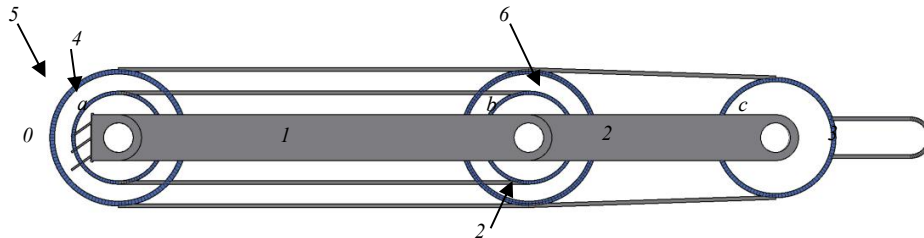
Two-dimensional sketch drawing of a three DOF robotic manipulator
